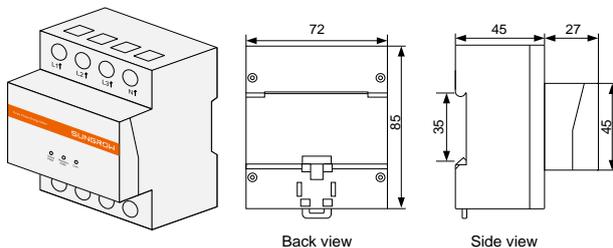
Three-phase Meter Dimensions (unit: mm)
